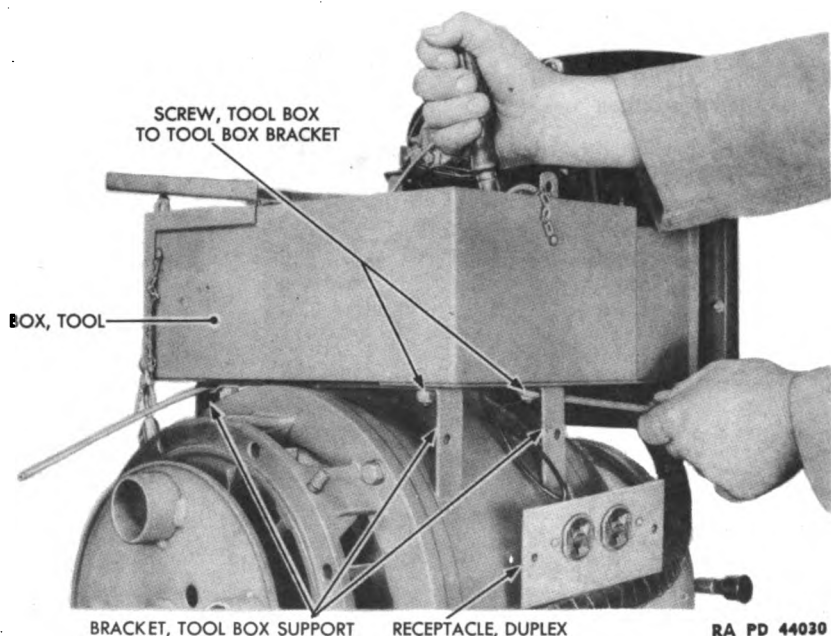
Removing Tool Box to Tool Box Bracket Screws
